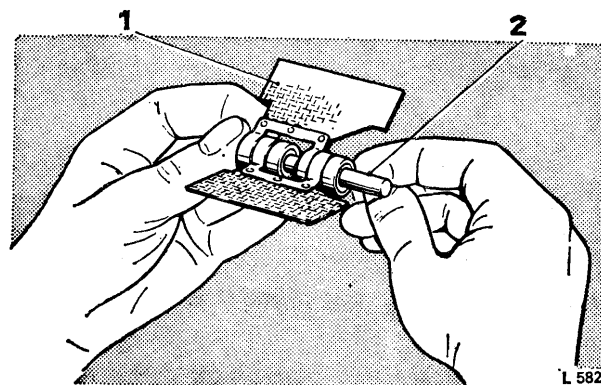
VANE MOUNTED ON ASSEMBLY PIN
